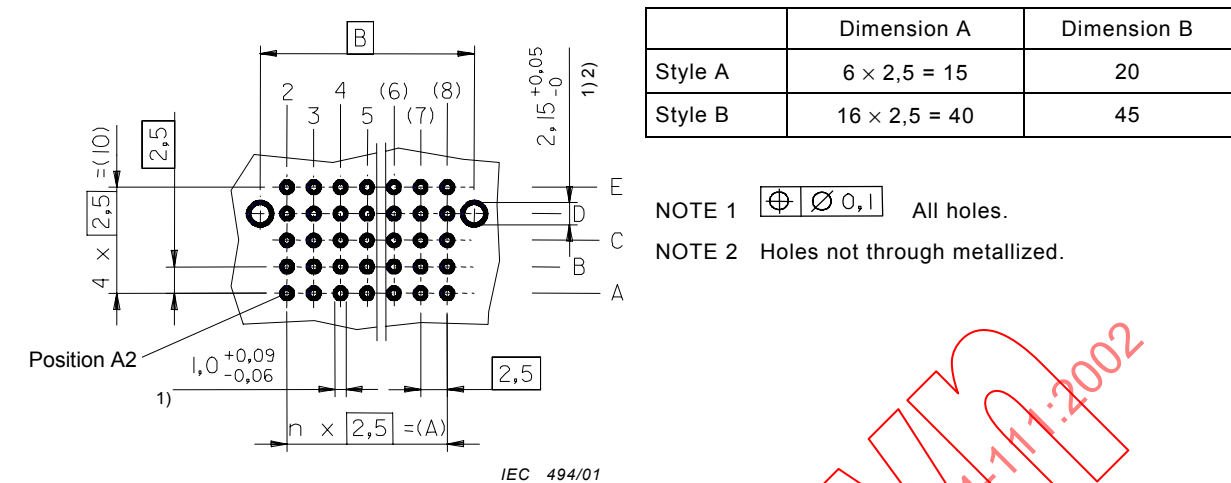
Example of hole pattern on backplane in the 25 mm equipment practice
